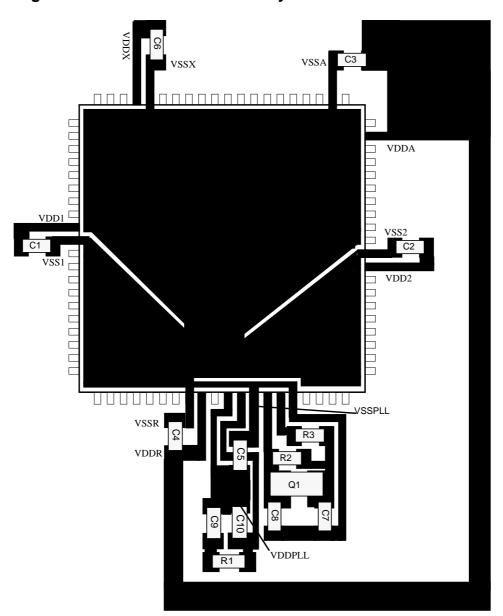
Recommended PCB Layout for 80QFP Pierce Oscillator
